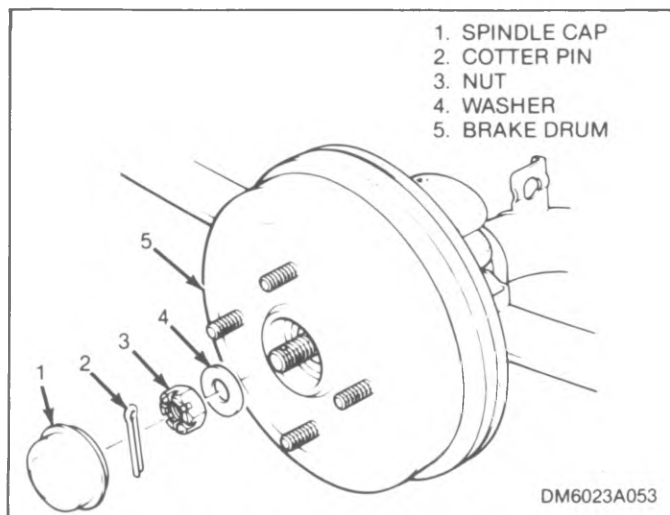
Remove and Install 1985-86 Sprint Brake Drum
